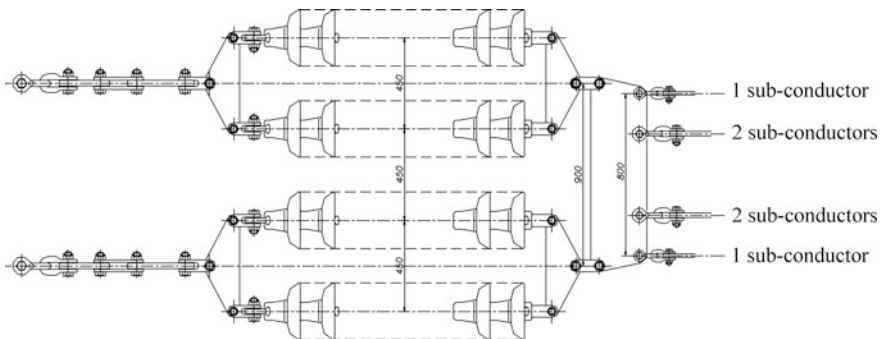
Horizontal layout of quadruple tension strings (4×420 kN)
